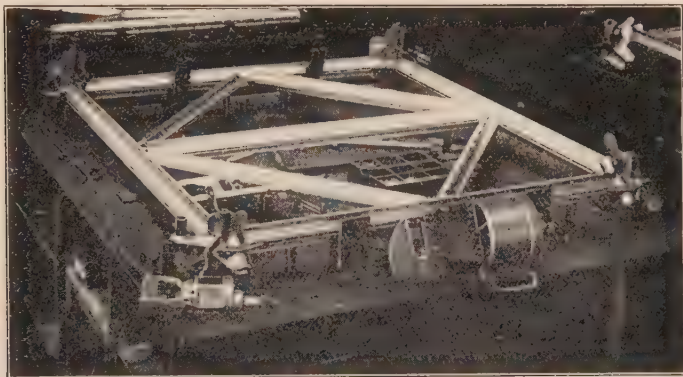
Assembling fixtures for fuselage bulk heads.
